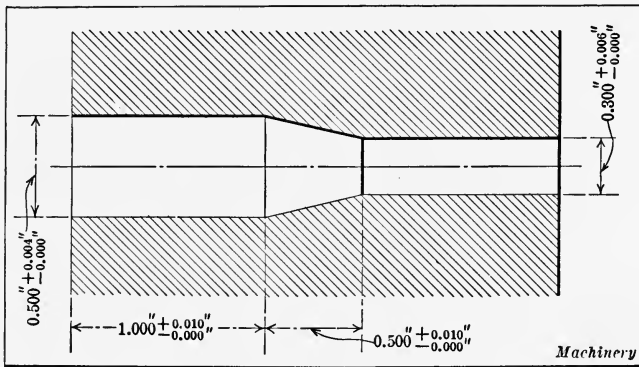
Incorrect Method of dimensioning Tapered Hole
